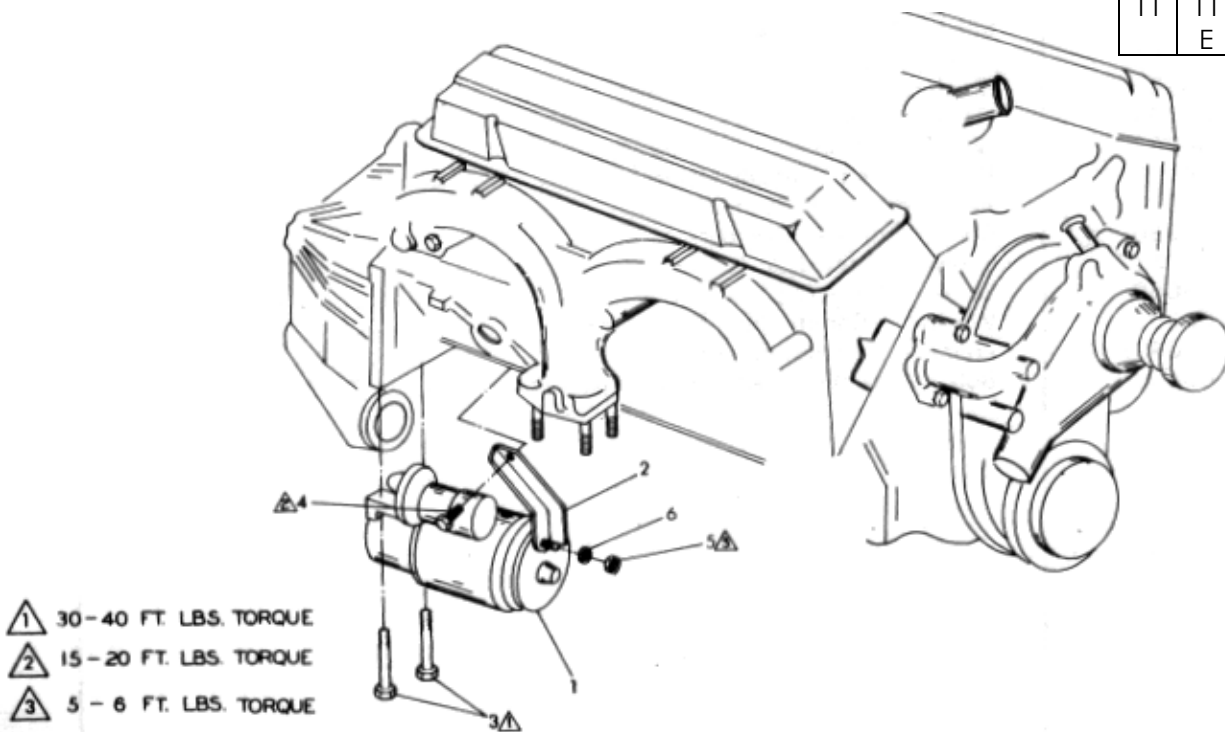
Starting Motor Mounting, 8 Cylinder
